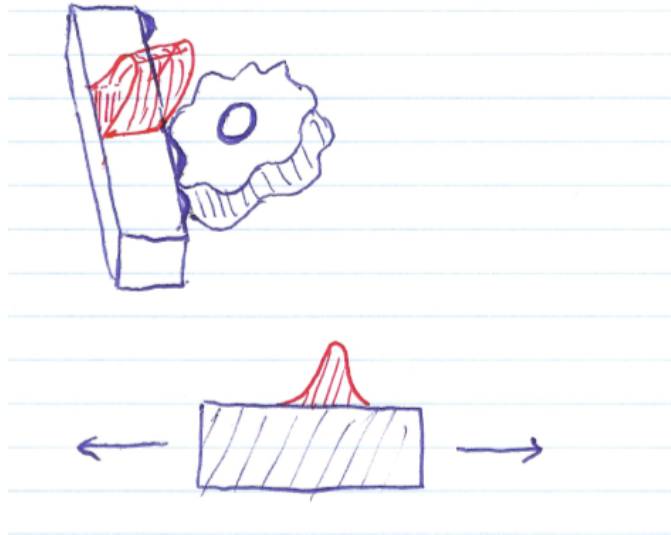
Hand-controlled, rack and pinion actuated cable system. This design shows that a switch could be used to manipulate a rack and pinion gear set.
